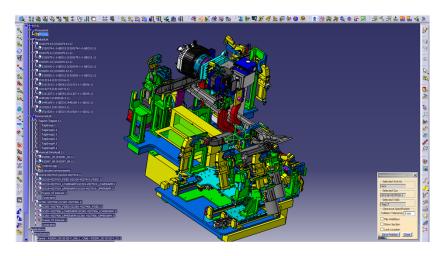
Using the manual "weld gun collision check" tool
